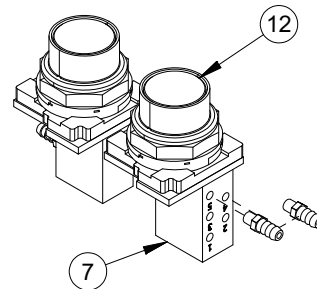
PNEUMATIC CONDITIONING UNIT ASSEMBLY (P/N 101920)
